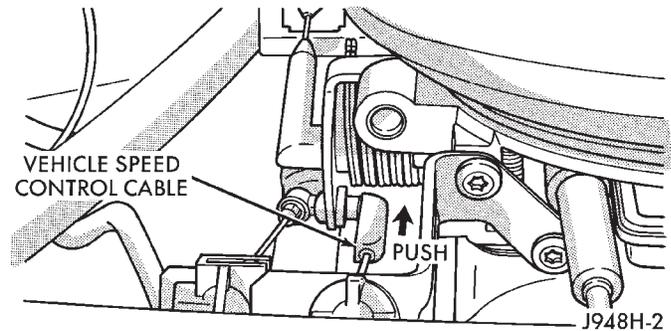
Cable at Bell Crank—5.2L/5.9L V-8 Engines
